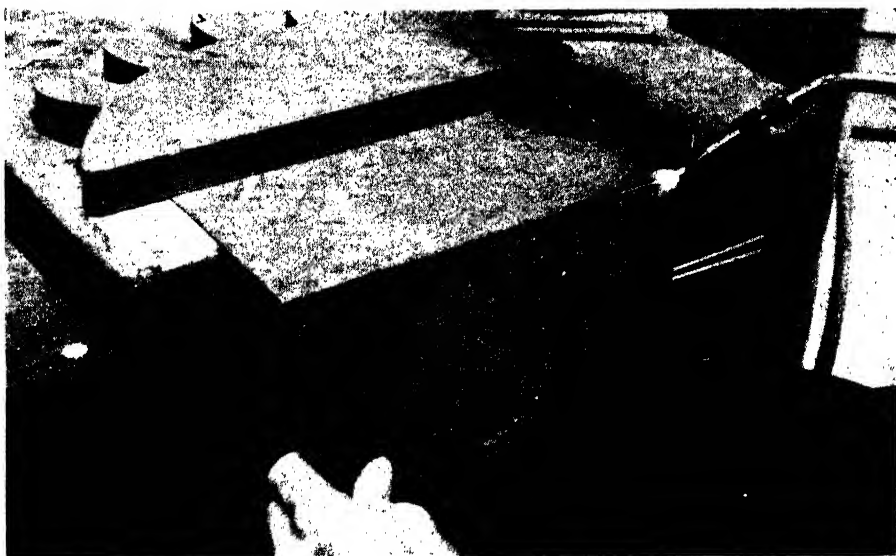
HOLDING AND TACKING PLATES FOR FREE EDGE WELDING WITHOUT FILLER ROD
